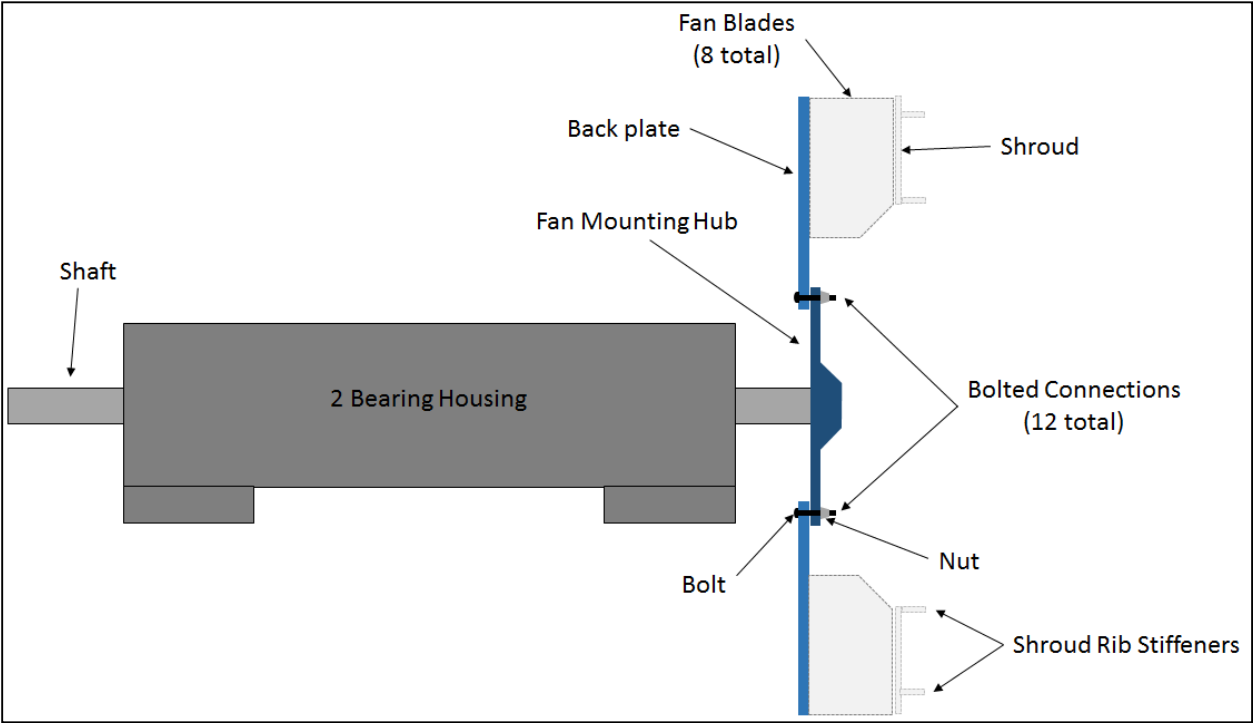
Schematic of fan assembly showing all components of the fan wheel.
